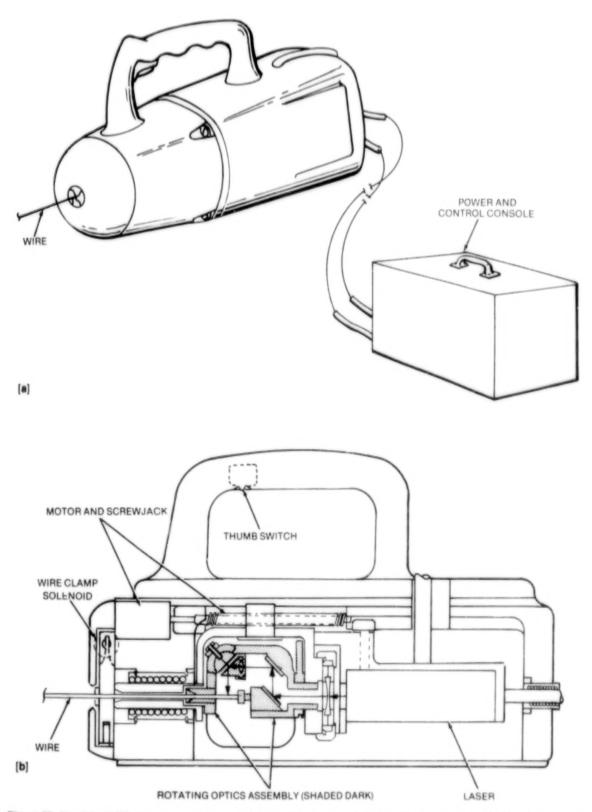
Hand-held CO₂ laser wire stripper. Original design concept sketch (a) shows a hand-held unit connected by flexible cable to its power-control support unit. The stripper head (b) contains the laser and the dynamic optical system for making circumferential and longitudinal cuts in the insulation. (MSC-19369)
